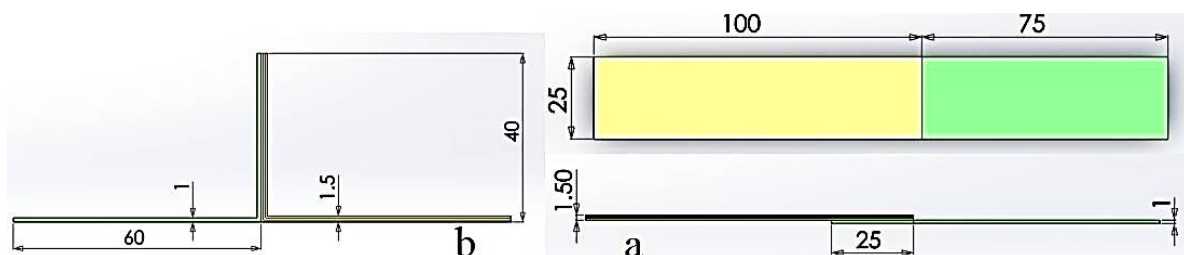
specimen Details of the shear test (a) and peel test (b).
